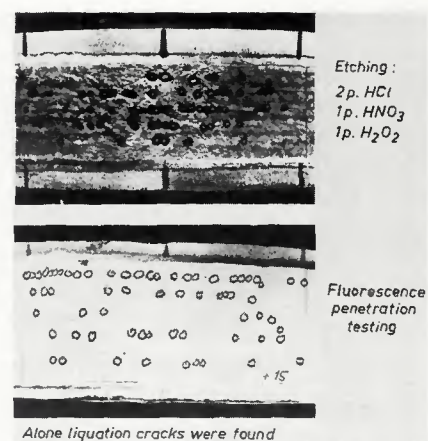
Appearance of fissure bend test specimens after testing (fully austenitic weld metal)
